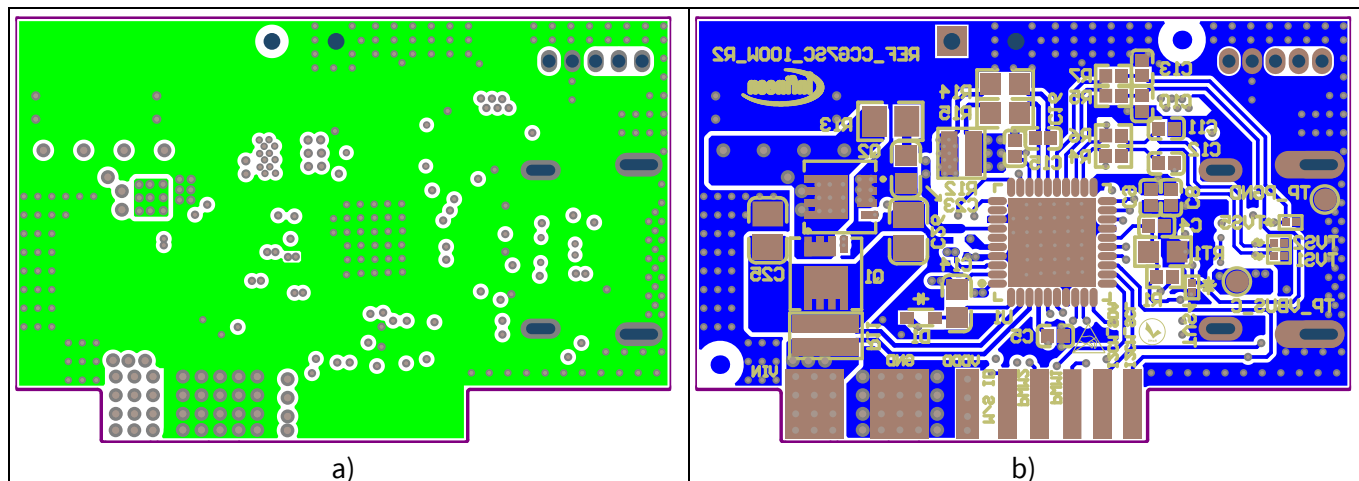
USB PD board layout – a) layer 3, b) bottom layer
